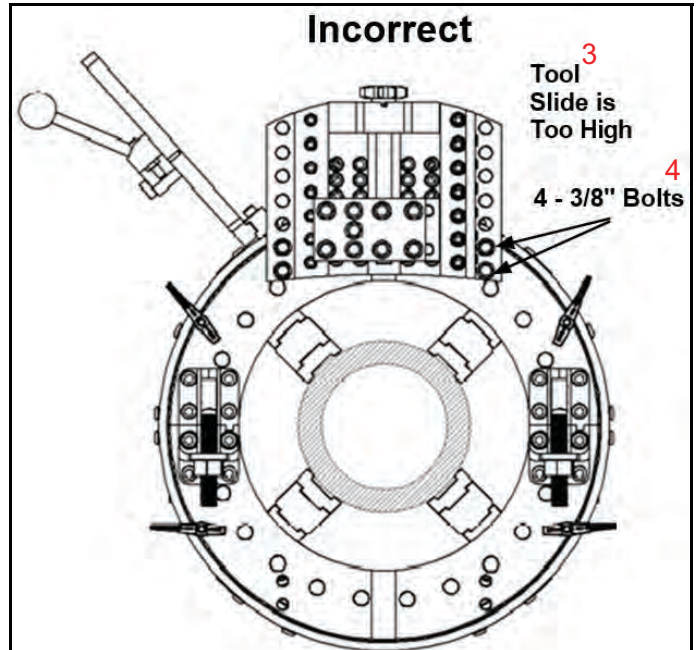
INCORRECT TOOL SLIDE ASSEMBLY POSITION
